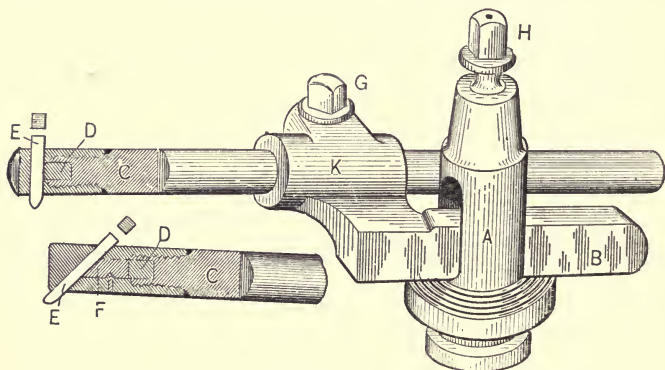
ARMSTRONG TOOL-HOLDER.
